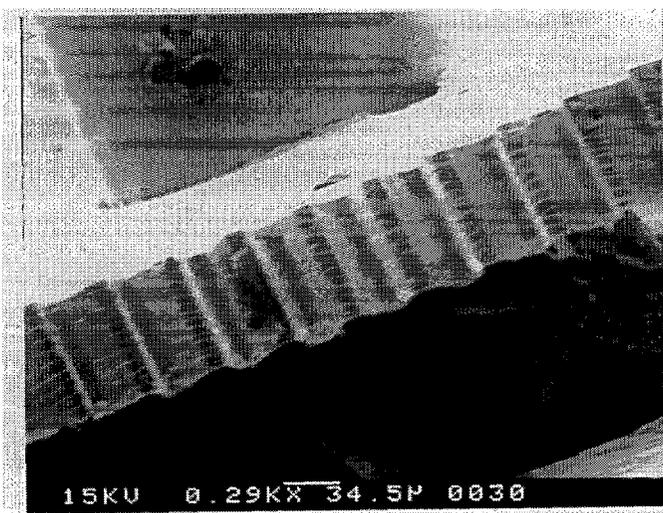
SEM micrograph of a 980 μm diameter gear, side view. The gear is 70 μm thick. The fixturing post can also be seen above the gear.
